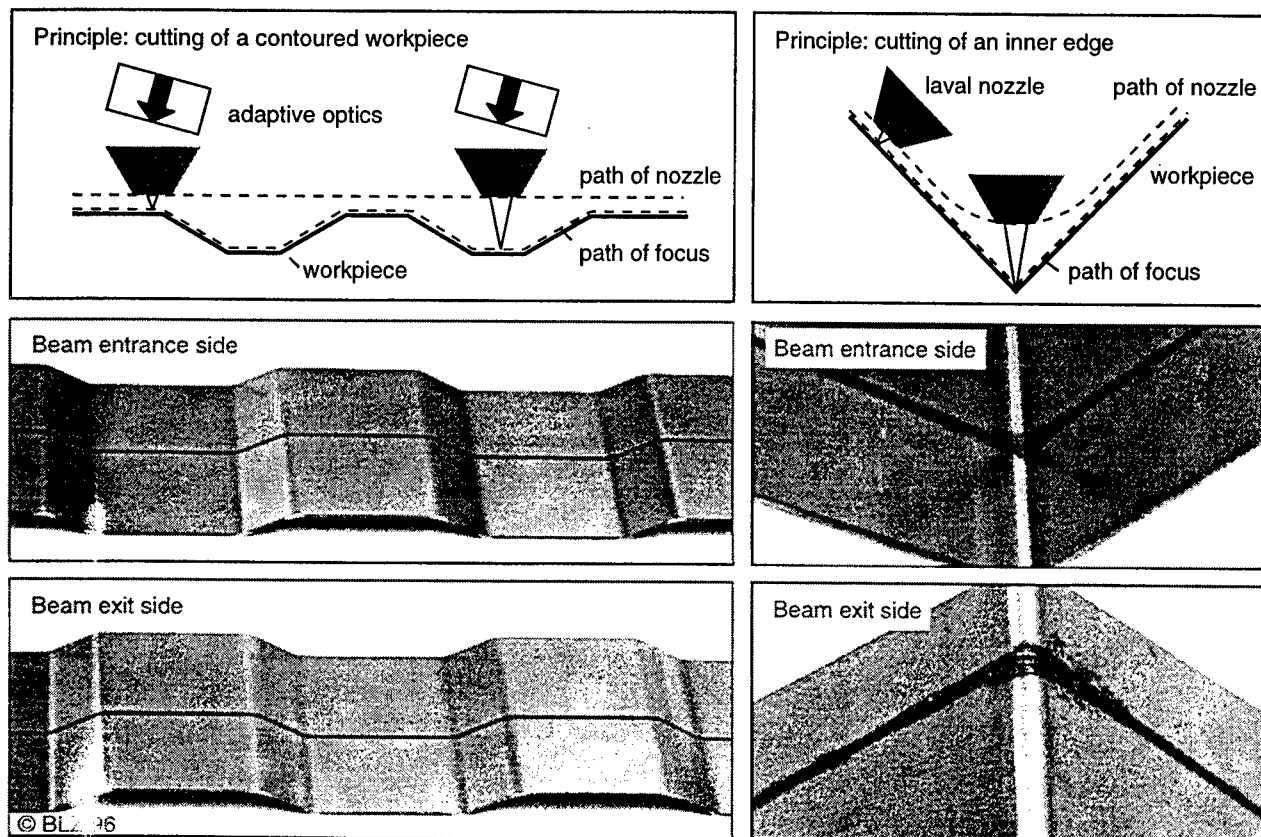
Test workpieces showing the possibilities of laser cutting with adaptive optics and Laval nozzles: beam entrance and exit side of the laser cut of a contoured workpiece and an inner edge.
